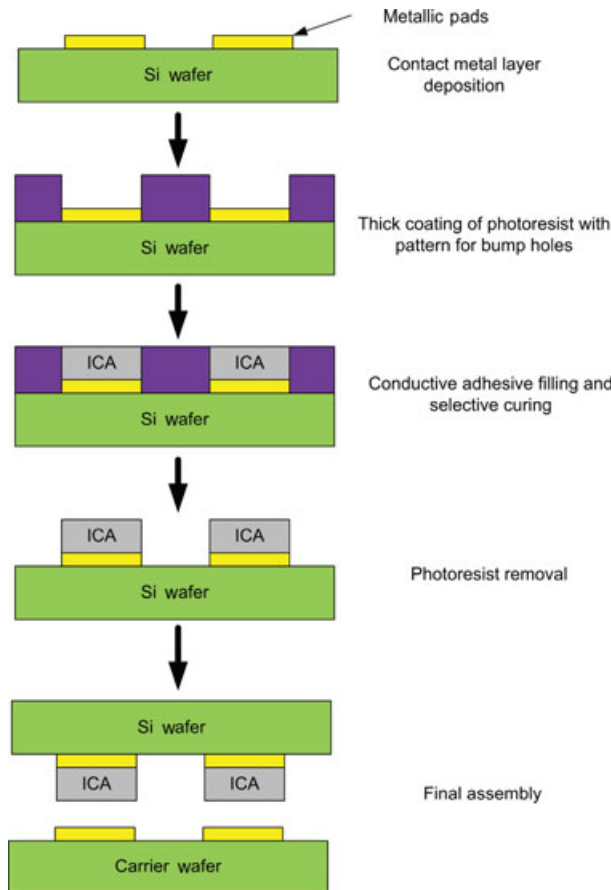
Schematic drawing of flip chip attachment with planarized bumps.
